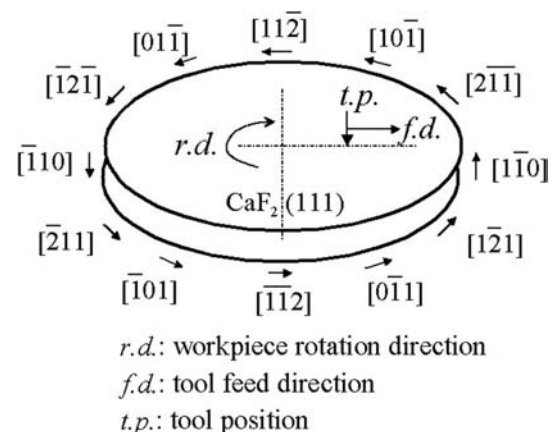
Schematic of the cutting model of a straight-nosed diamond tool
